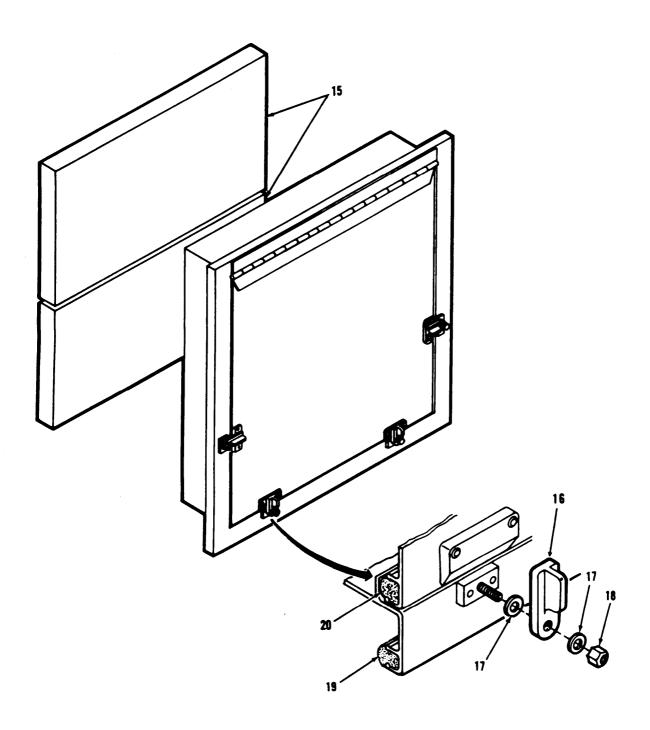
Shelter, Electrical Equipment S-280C/G (Sheet 2 of 2).
